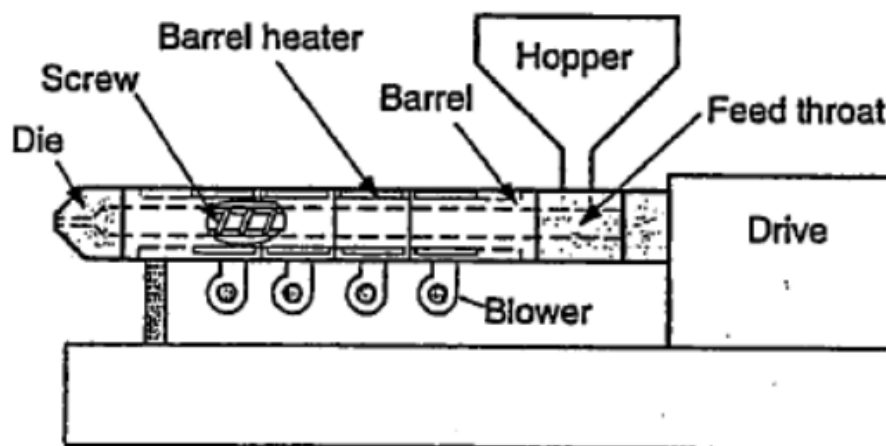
Screw, barrel and heaters in a single screw extruder.
